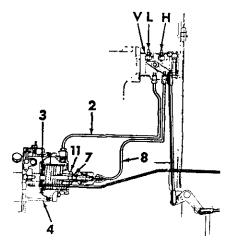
Schematic view showing governor assembly, venturi and the connecting pipes used on early B-275 tractors.
